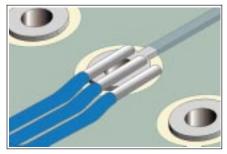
Not Recommended Multiple wires soldered to pad overhanging pad edge.
